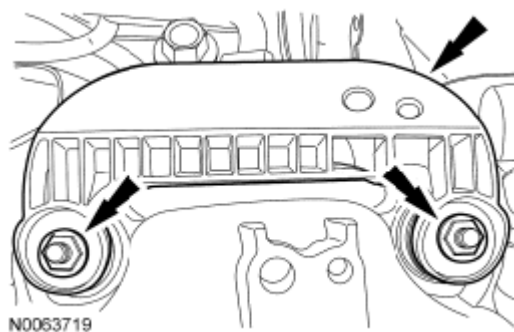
Locating Wiring Harness Retaining Bracket & Nuts
